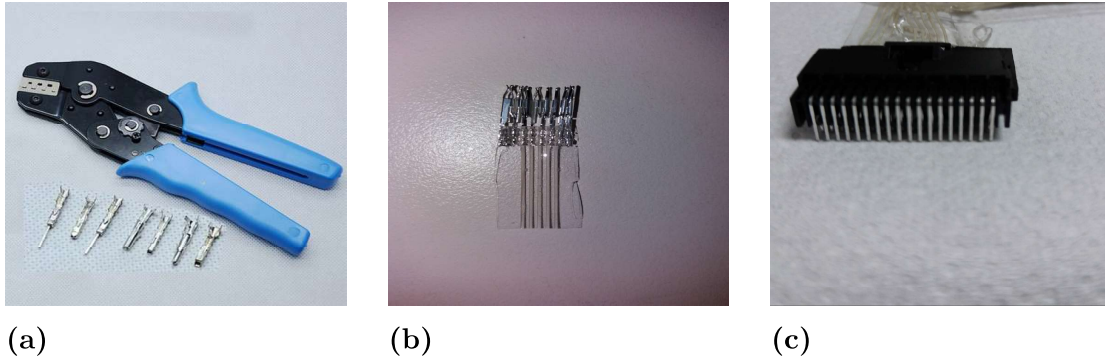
a) Crimping tool. b) Metal 'claws' crimped with AgPDMS lines. c) Crimp connector.
